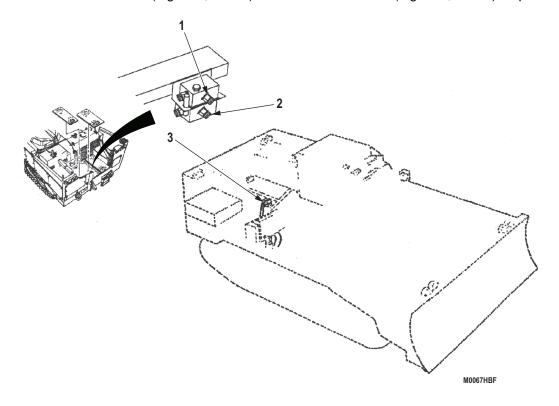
Blade Folder Hoses and Flow Valves Removal.
